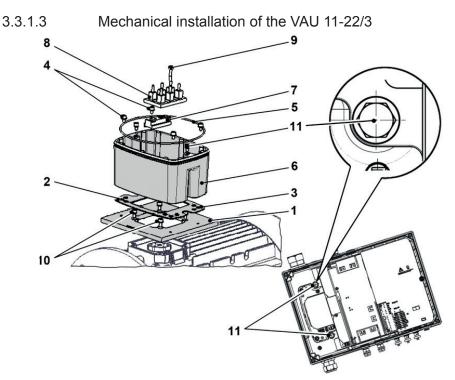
Assembly sequence: Terminal box – adapter plate VAU 4/11-22/3
